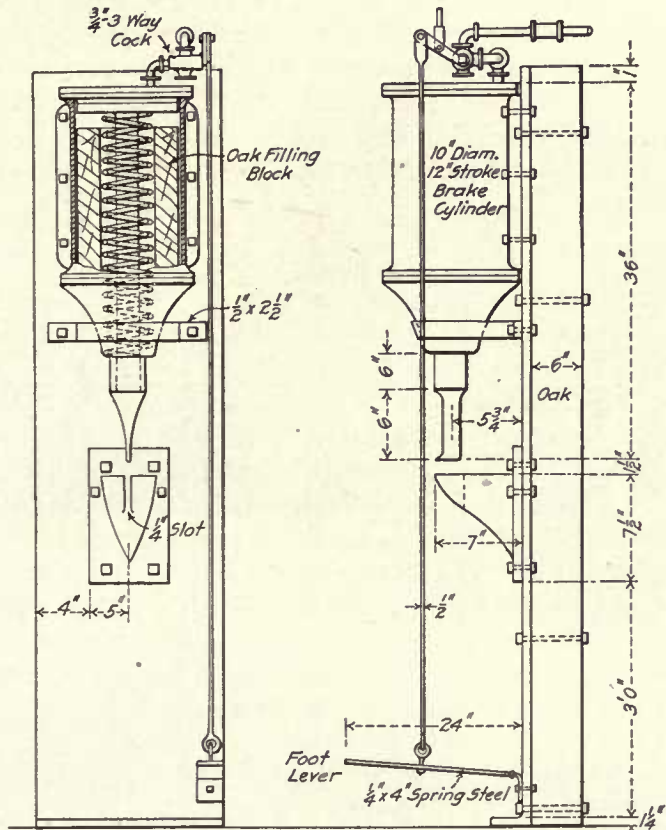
Air Operated Machine for Cutting Air Hose Clamp Bolts.
